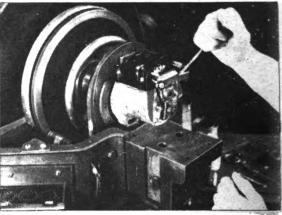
Method of Removing or Properly Meshing Distributor Gear with Steel Gear
